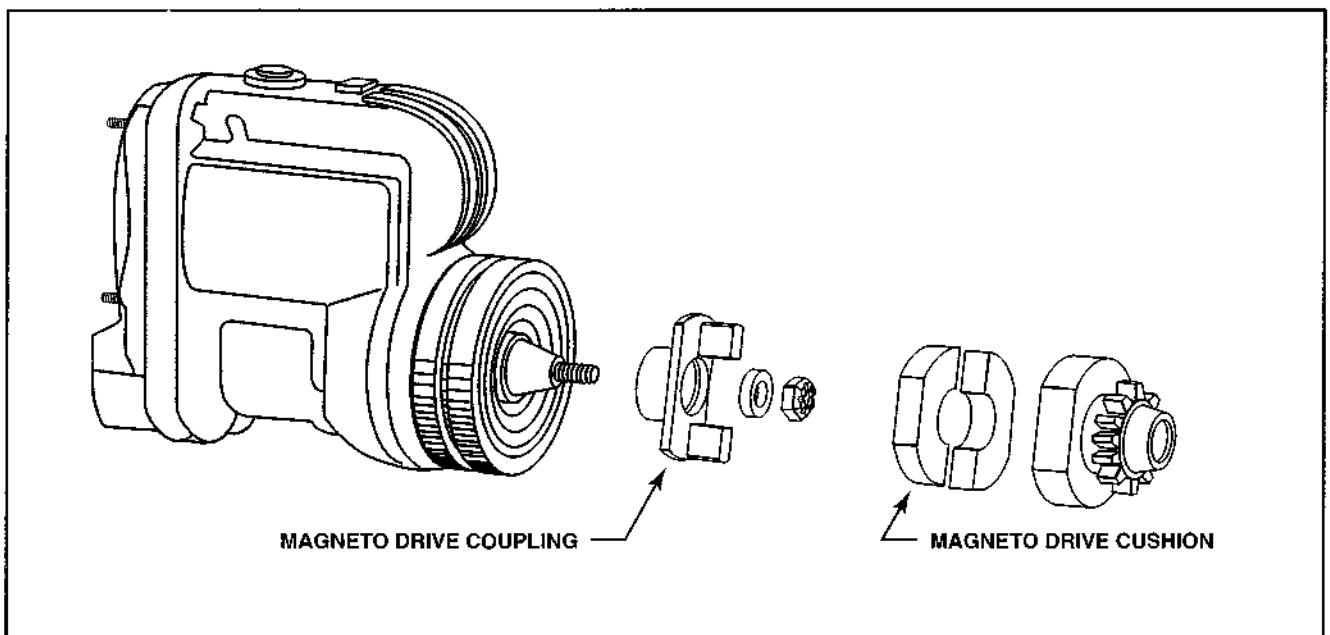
Some magnetos are connected to the engine with an anti-vibration coupling. The engine drives the magneto through a rubber cushion housed by a steel retainer attached to the magneto drive gear. The cushion reduces the amount of vibration transferred to the magneto.
